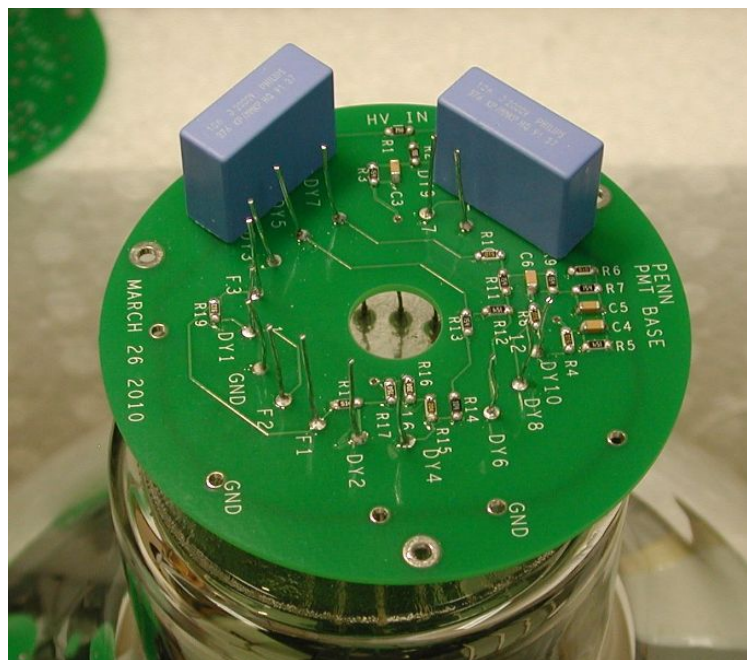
Prototype printed circuit board, with components, attached to a candidate PMT.
